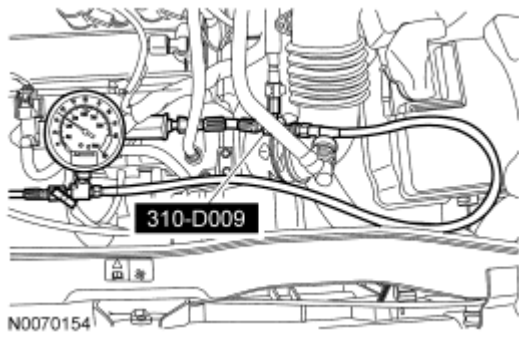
Identifying Fuel Jumper Tube, Fuel Rail & Special Tool (310-D009)
